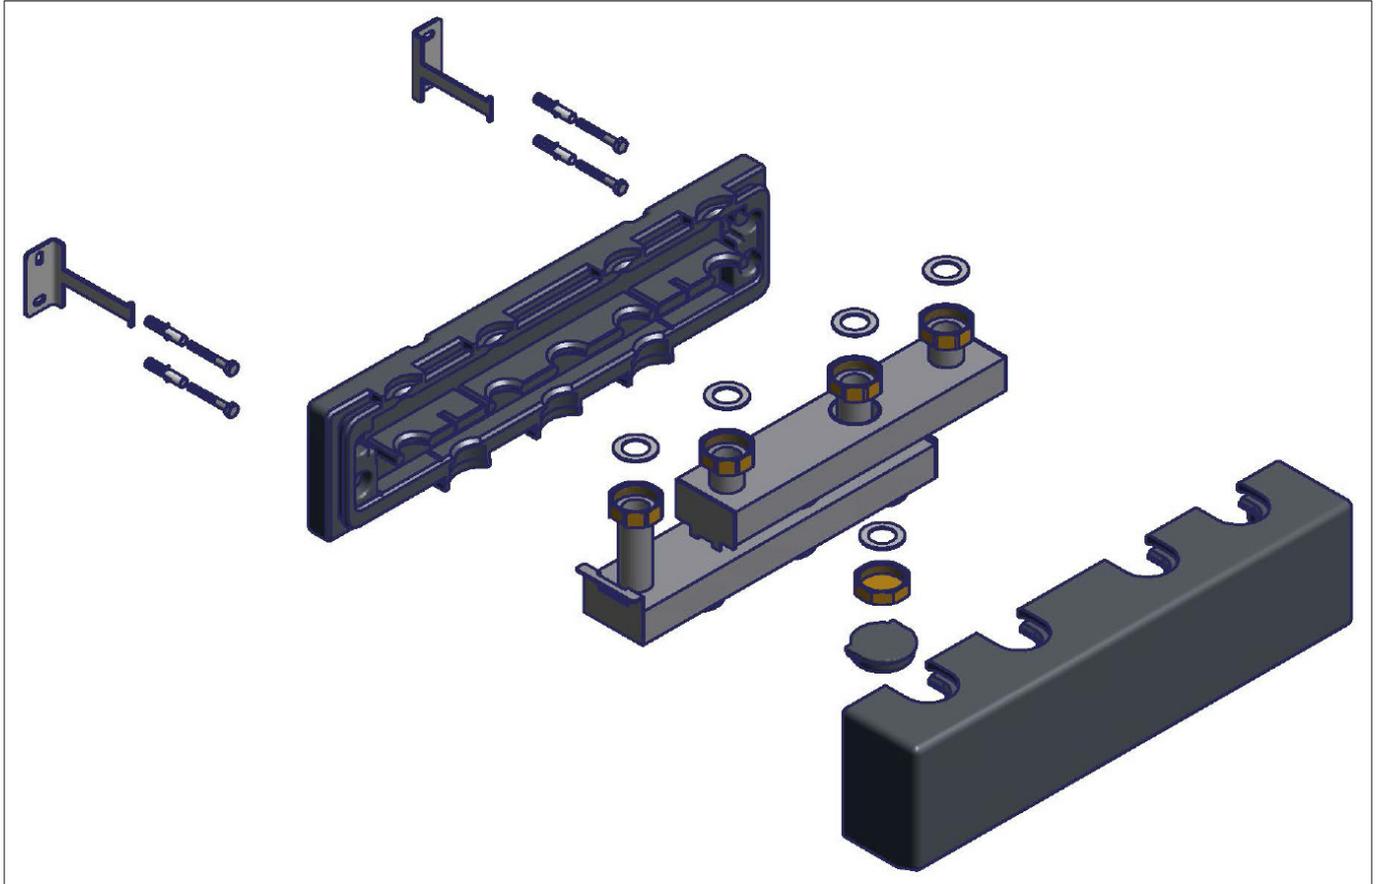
Wall-mounted installation / optionally with wall bracket and fastening set
